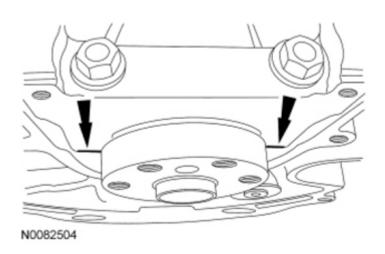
Locating Main Bearing Beam Courtesy of FORD MOTOR CO.
